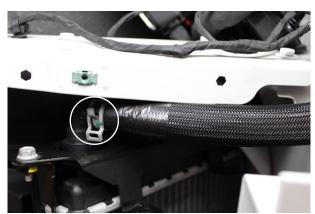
x: Cut 5/8" Coolant Hose & Braided Sleeve To Length & Secure
